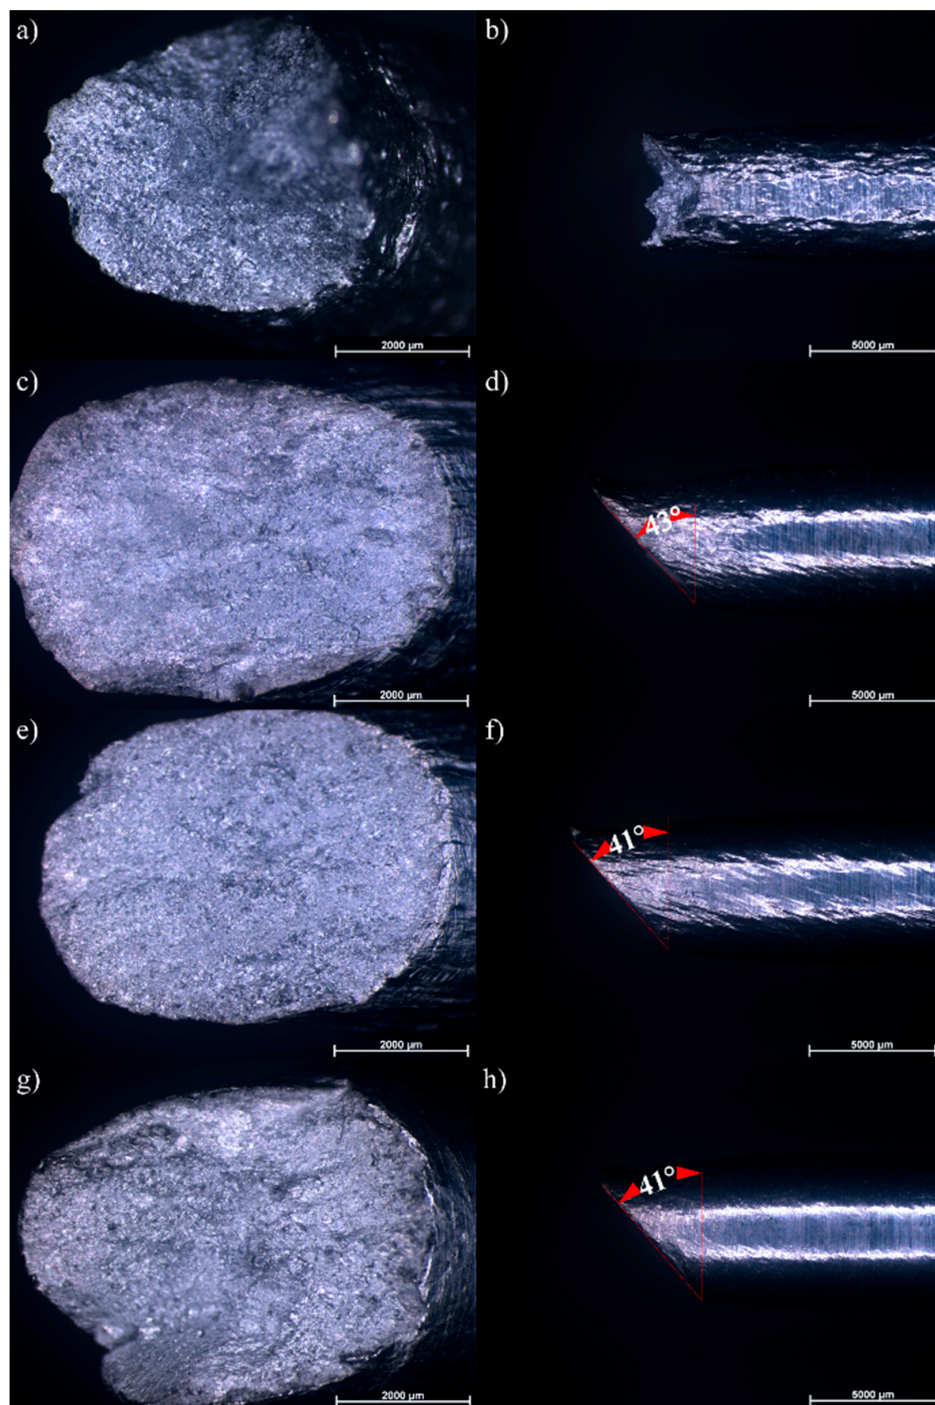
Fracture surfaces of as-built vertical and horizontal samples: (a) and (b) solution-treated (ST); (c) and (d) ST + ECAP 2 \times ; (e) and (f) ST + ECAP 2 \times + ageing 160°C for 4 h; and (g) and (h) ST + ECAP 2 \times + ageing 180°C for 4 h.
